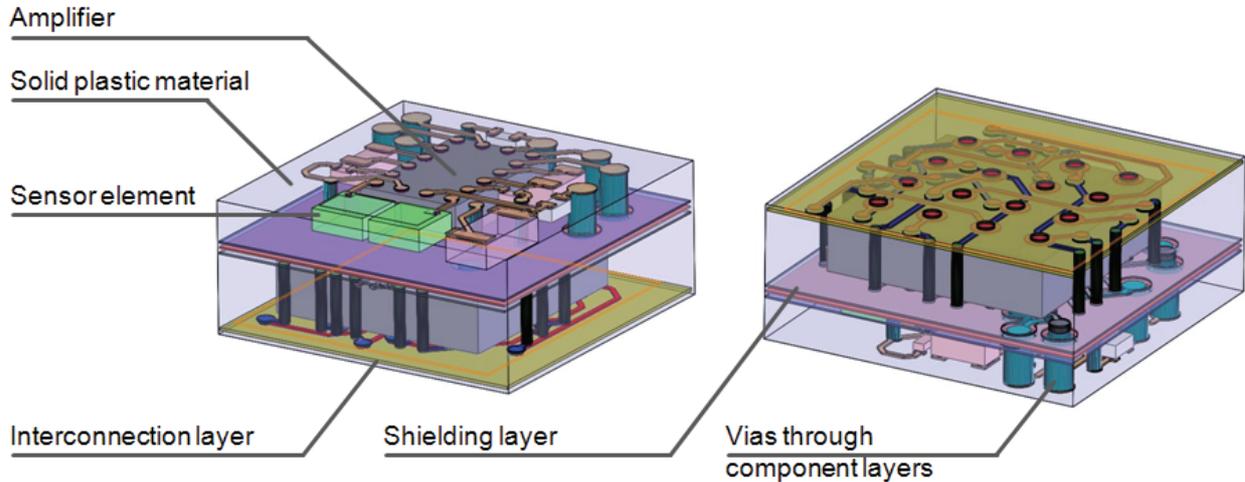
3D design of a sensor package: Top view (left) and bottom view (right)
